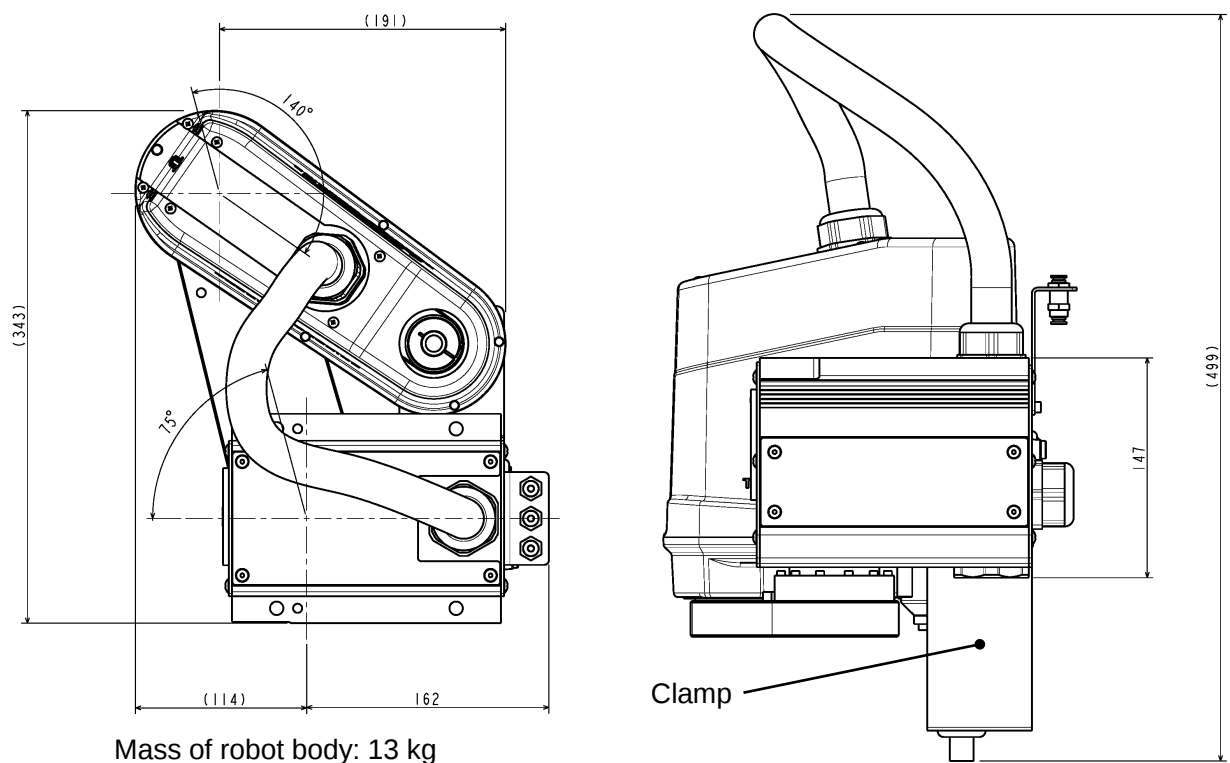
Outer dimensions at transport (KHL-400-T)
